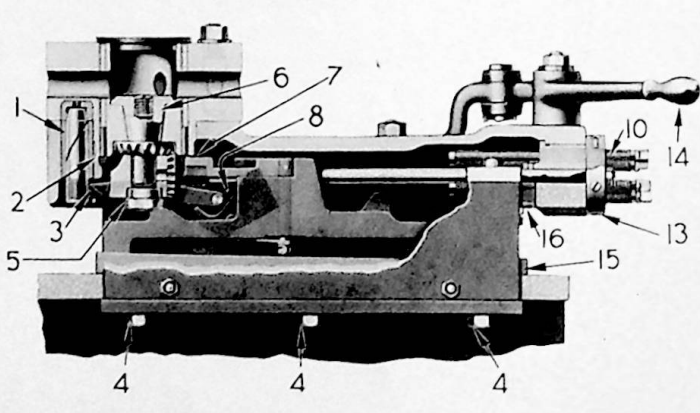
Phantom View of Turret Slide and Saddle for No. 1 Electric Turret Lathe.
